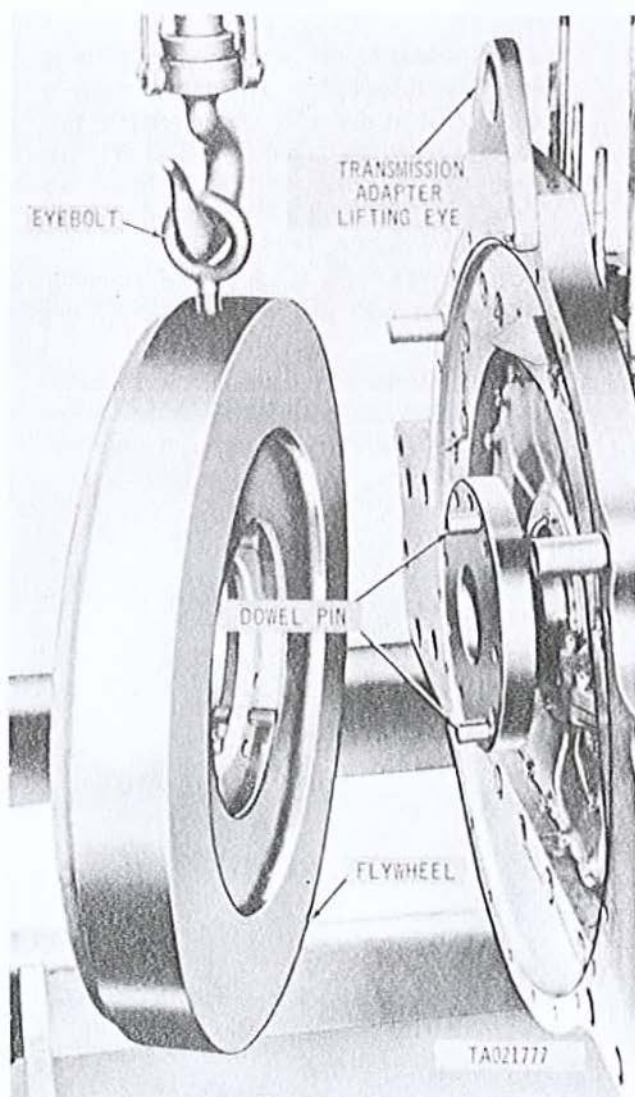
Installing flywheel using eye bolt, model AVDS-1790-2C and AVDS-1790-2D engines.
